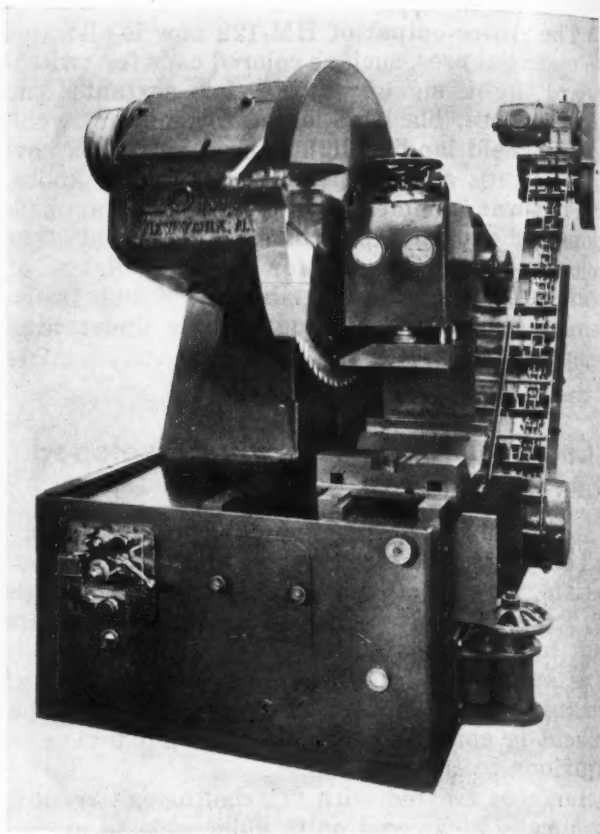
Metal-cutting Saw in which the Housing, Guards, etc., are of Arc-welded Design
